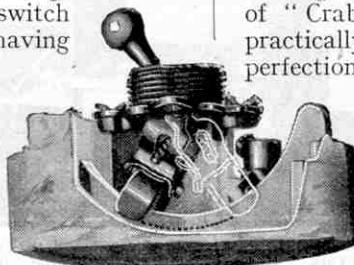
Sectional view indicating how the switch arm swings backward and forward.
